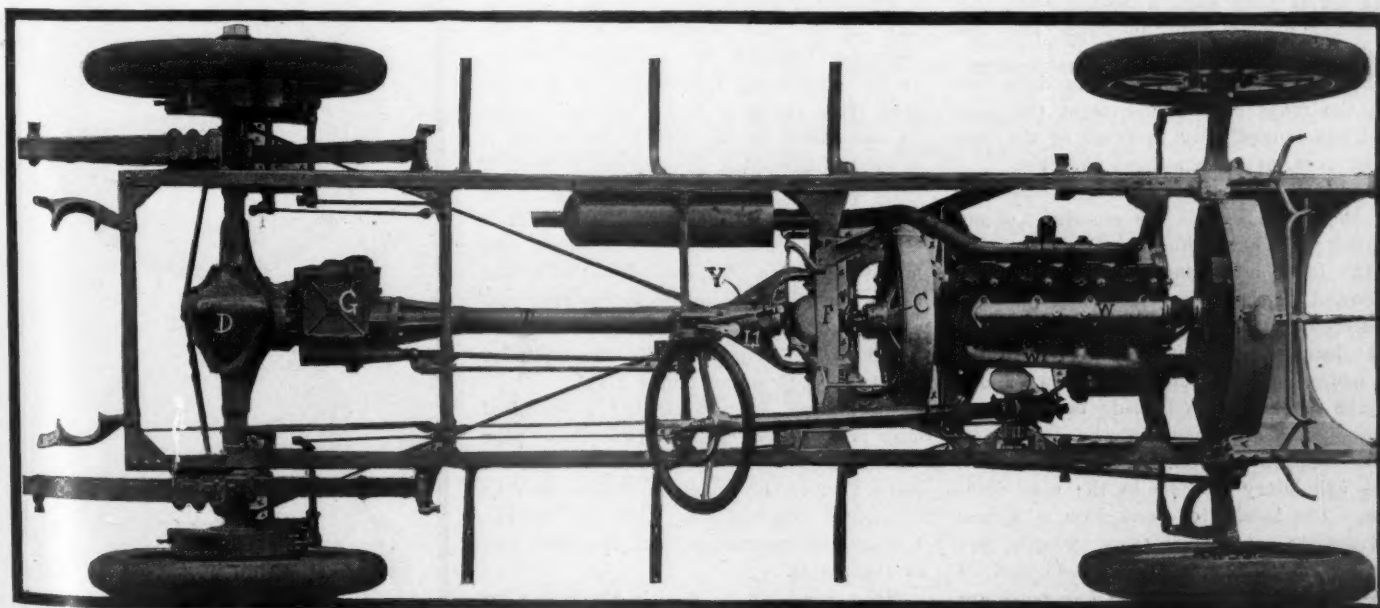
THE TYPICAL OVERLAND CHASSIS—THE PARTS ARE: W AND W1, THERMO-SYPHON WATER PIPES; C, CONE CLUTCH; F, MALLEABLE FRAME CROSS MEMBER; T, TORSION TUBE; Y, TORSION TUBE YOKE; G, GEARBOX; D, DIFFERENTIAL UNIT WITH GEARSET
